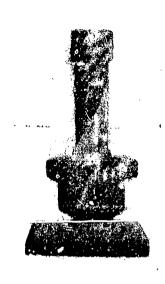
Pressing the low range gear onto the intermediate shaft
